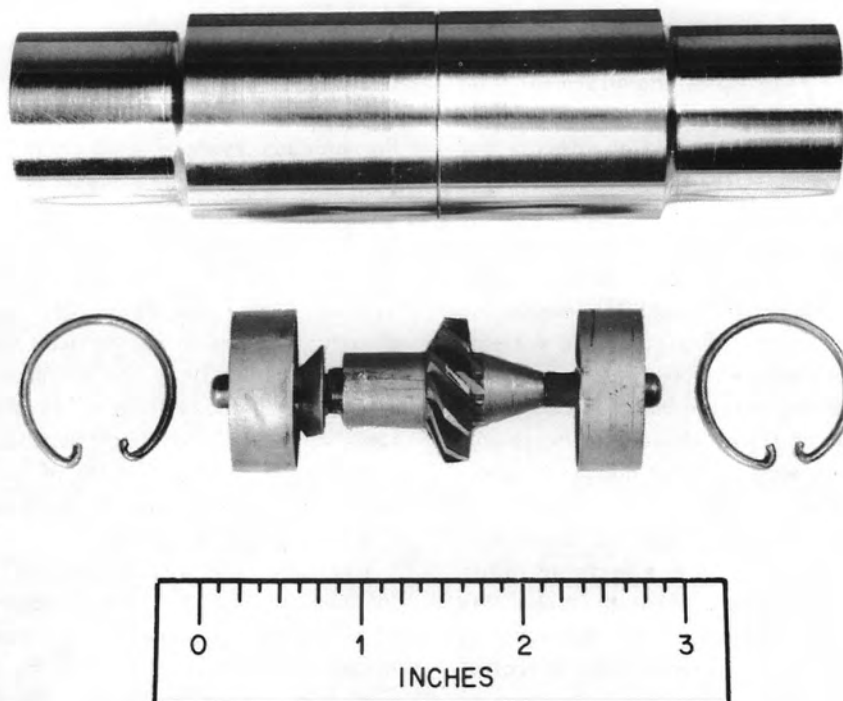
Turbine-Type Magnetic Flowmeter, Exploded View.
